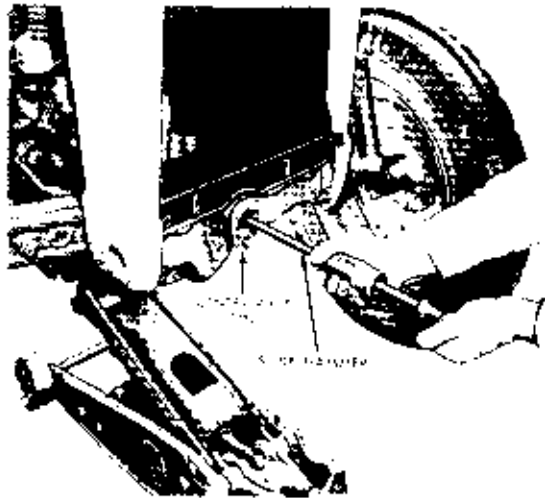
Removing original type non-threaded front axle pivot pin using a slide hammer arrangement.
